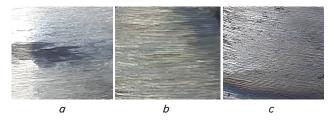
Cross-section of the cutting specimens of: a - Al; b - mild steel ST37; c - cast iron
